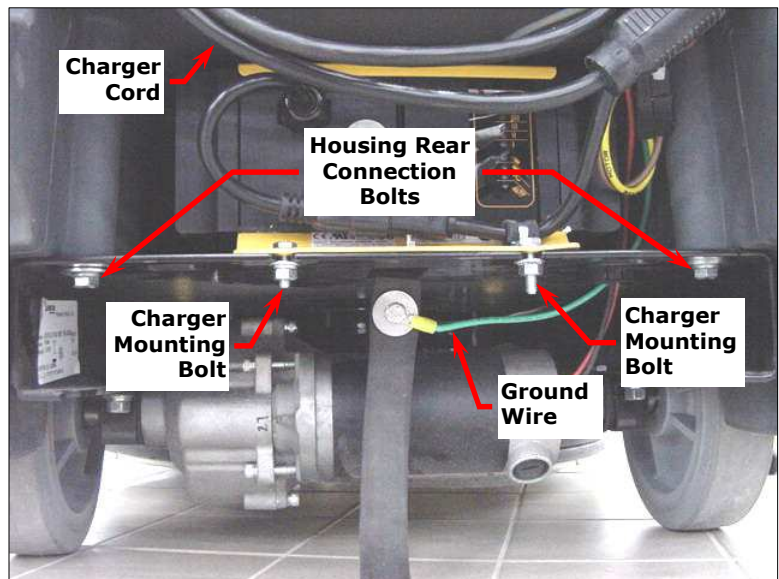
Charger Connections/Housing Rear Connection Bolts
